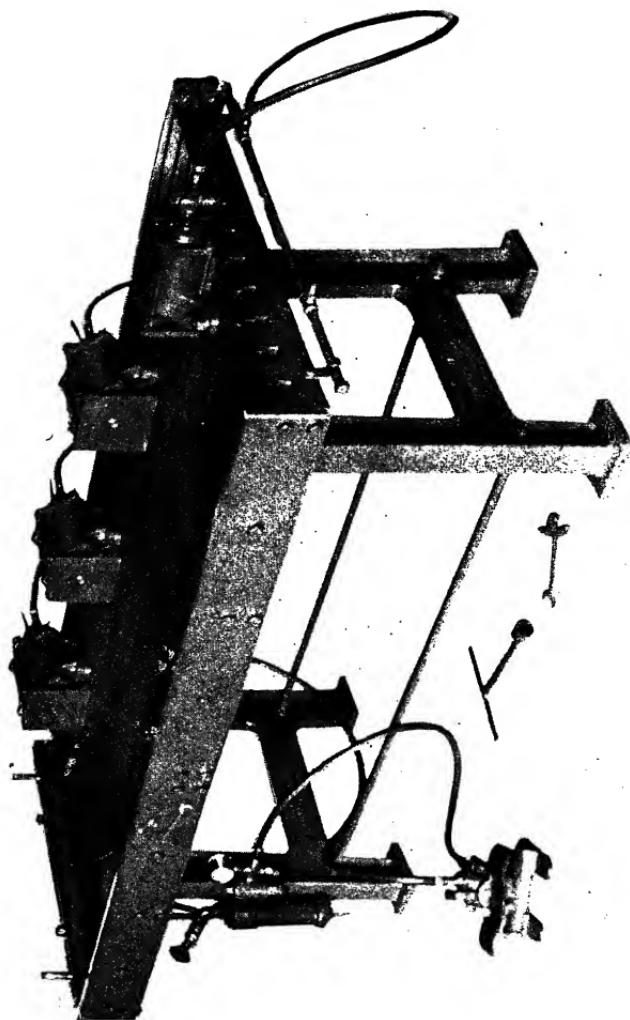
A UNIVERSAL PNEUMATIC CLAMP TABLE
